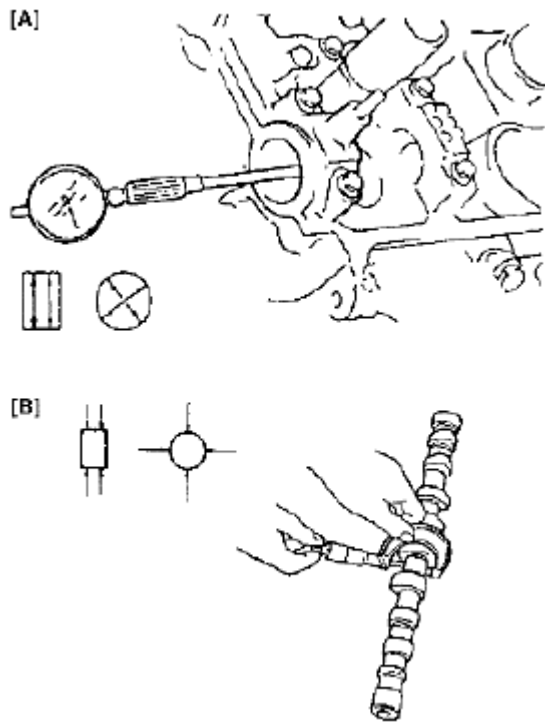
Measuring Journal (Housing) Bore & Outside Diameter Of Camshaft Journal
